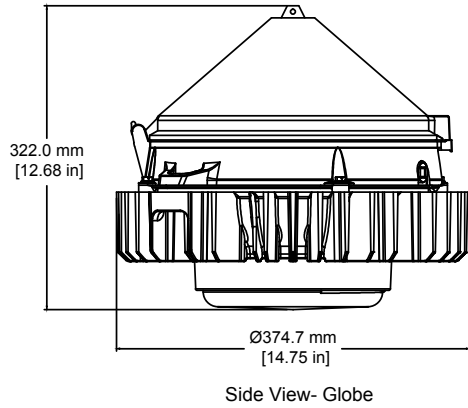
PENDANT HOOD DETAILS (SMOOTH BORE BUSHING VERSION)
